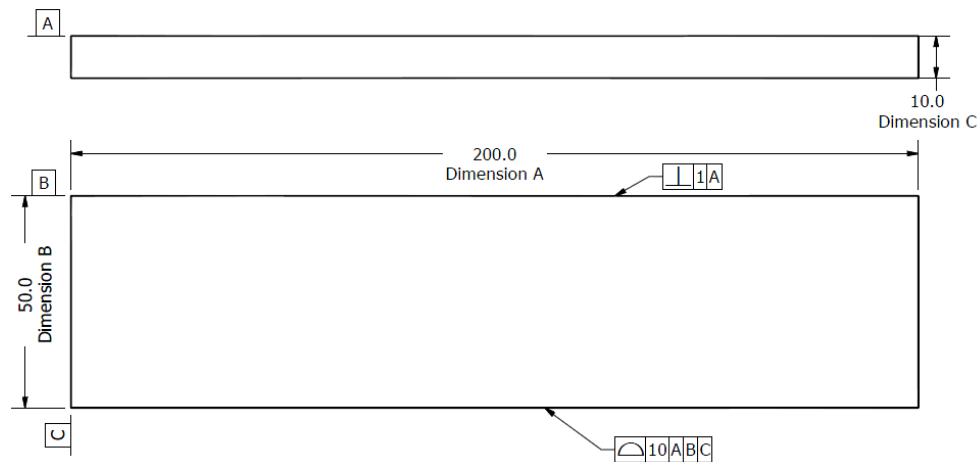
Engineering drawing of Block 1 with datums and geometric tolerances.
